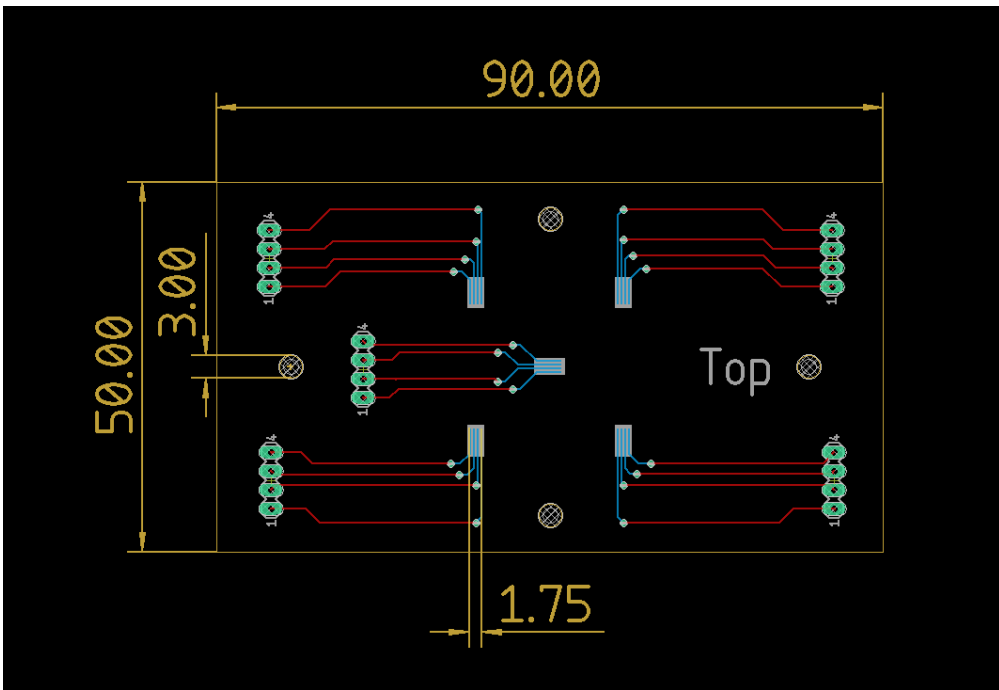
PCB Layout of top probe with in red the top copper and in blue the bottom copper
